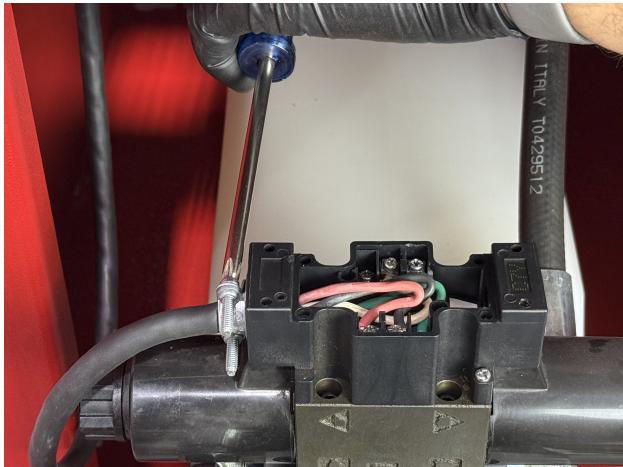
Loosen the motor cable clamp and remove the cable.
